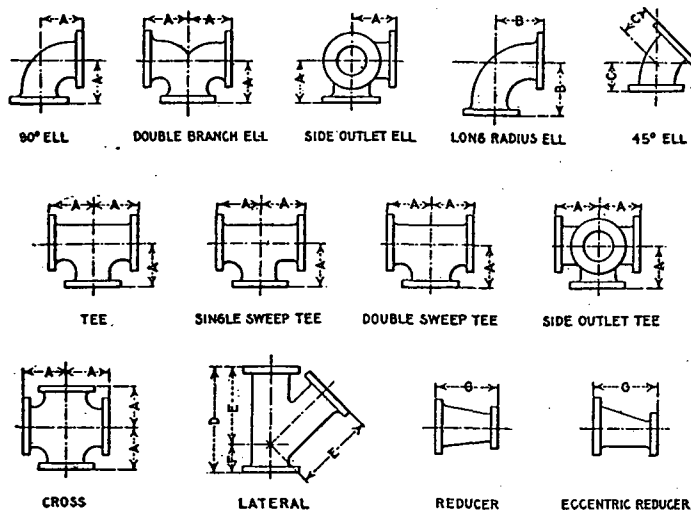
STANDARD TYPES OF FLANGE FITTINGS DIMENSIONED IN
